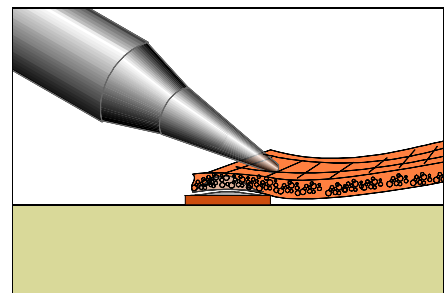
Remove excess solder from surface mount pads using a solder iron and solder braid.
